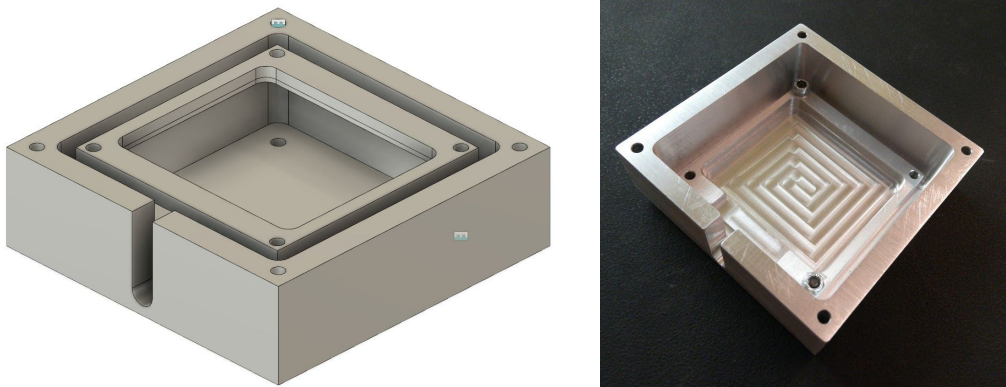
Heater Clamp shown within the Oven in CAD and actual
